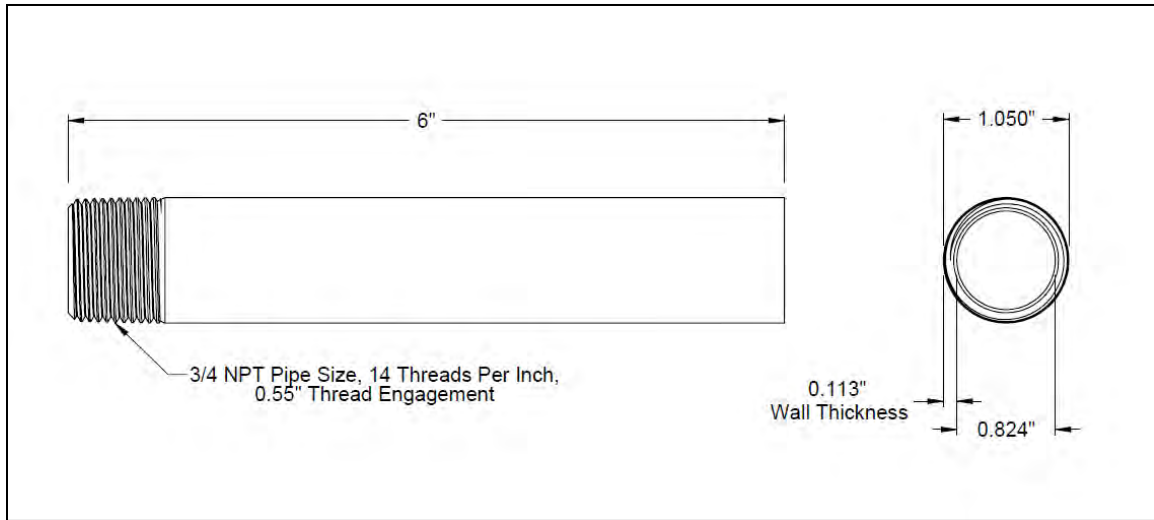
3/4 NPT pipe shroud tube drawing.
